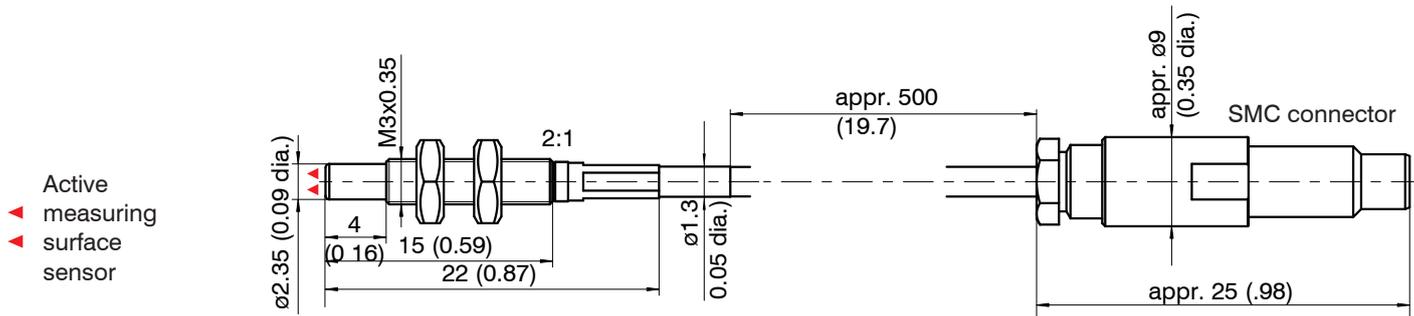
Dimensions EPU05 without cable extension, dimensions in mm (inches), not to scale
